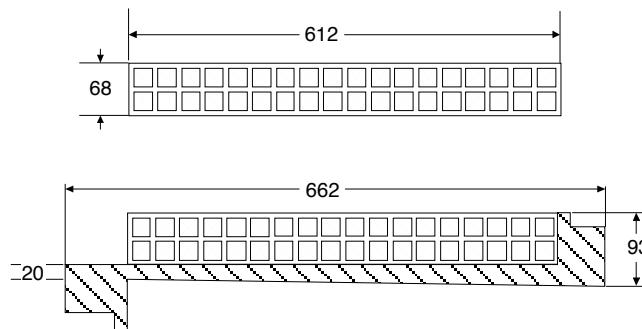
Top: double pancake of the winding pack. Number of turns 2x18. Bottom: double pancake on winding mould.
